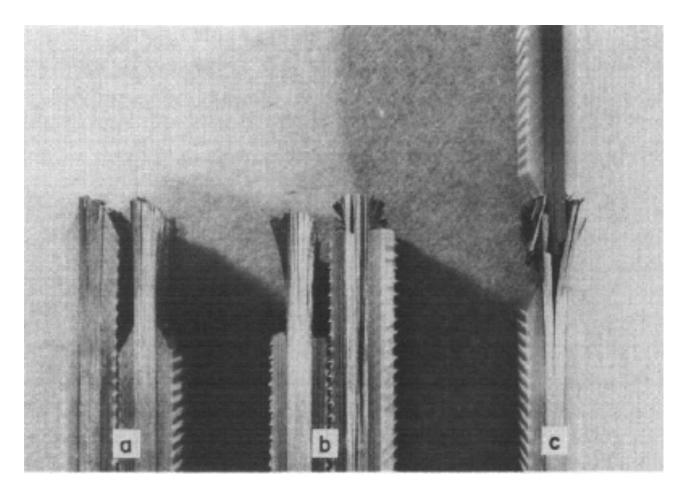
Compressive fracture, a) shear failure, b) microbuckling failure, c) splitting failure (Shikhmanter *et al*, 1991)
